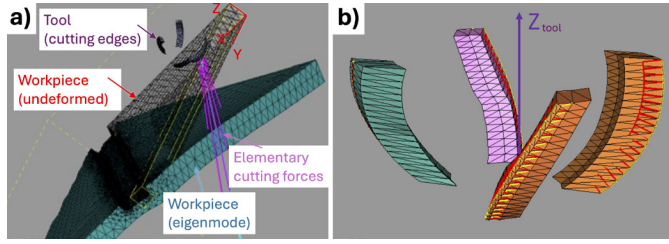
Model details : a) Workpiece mesh + eigenshape, b) tool active parts (cutting edges + rake faces)
